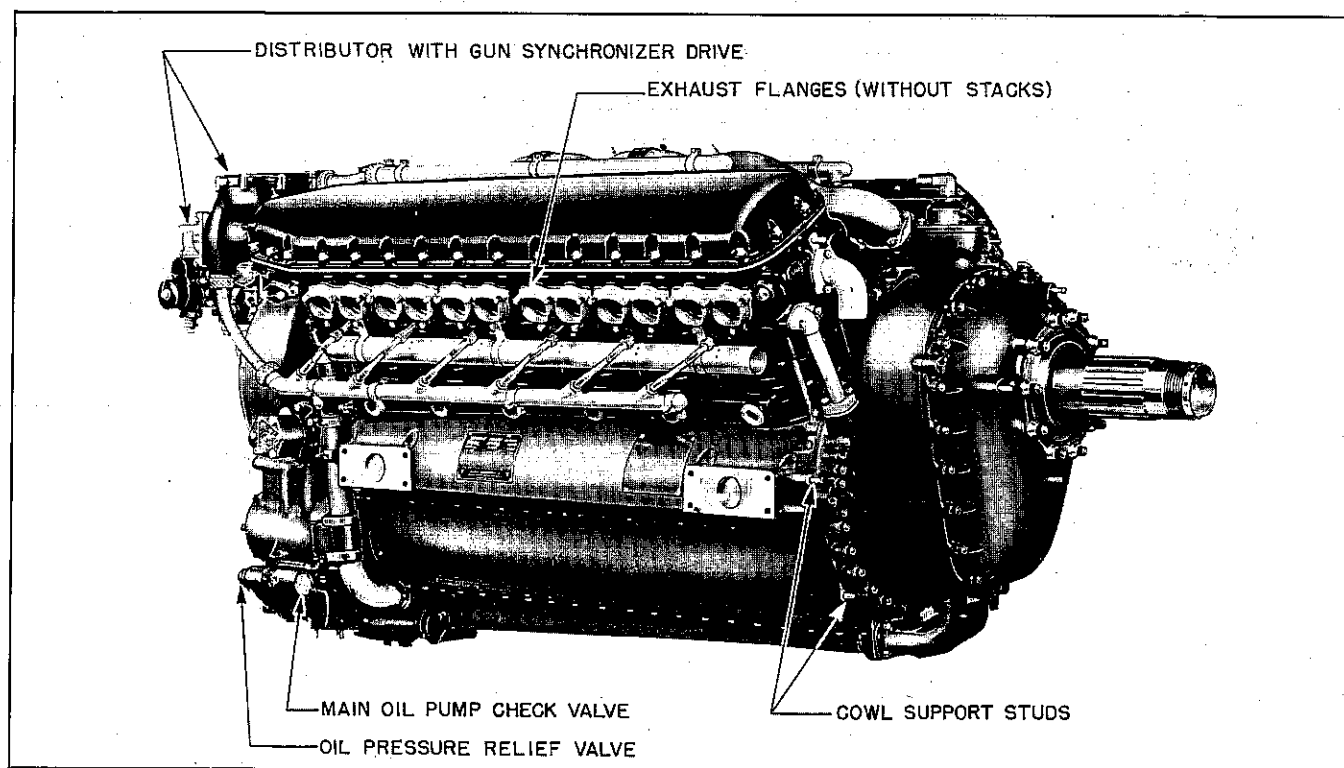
$\frac{3}{4}$ Right Front View of V-1710-F3R Model Engine.
